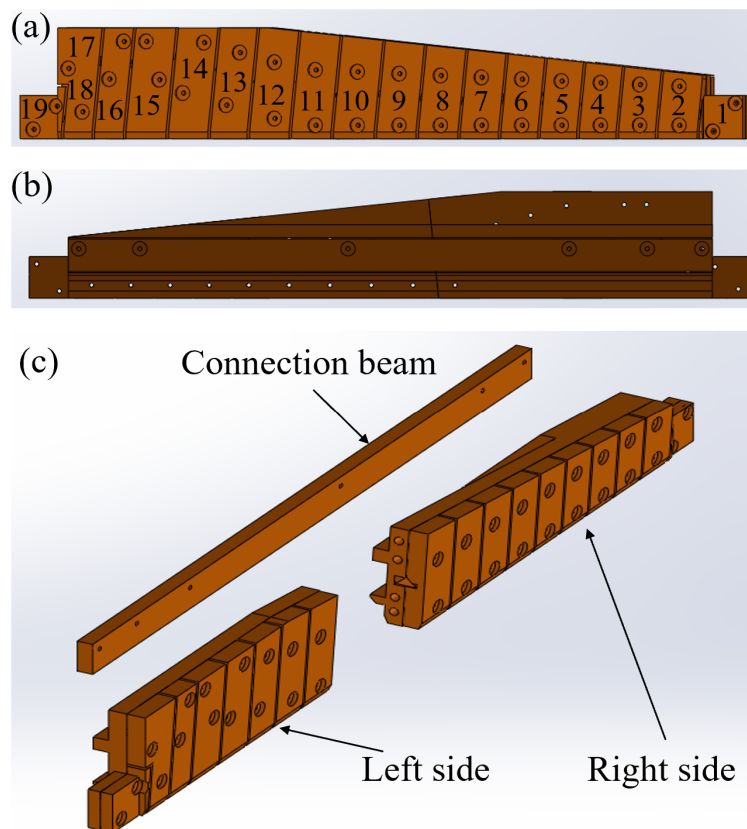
Assembly of magnets holder type II: (a) front view, (b) back view, and (c) exploded isometric view.
